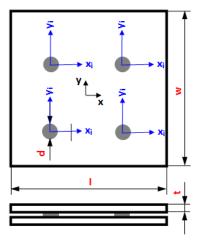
Geometry of square plate with four spot weld joints and design variables (top and side views)
